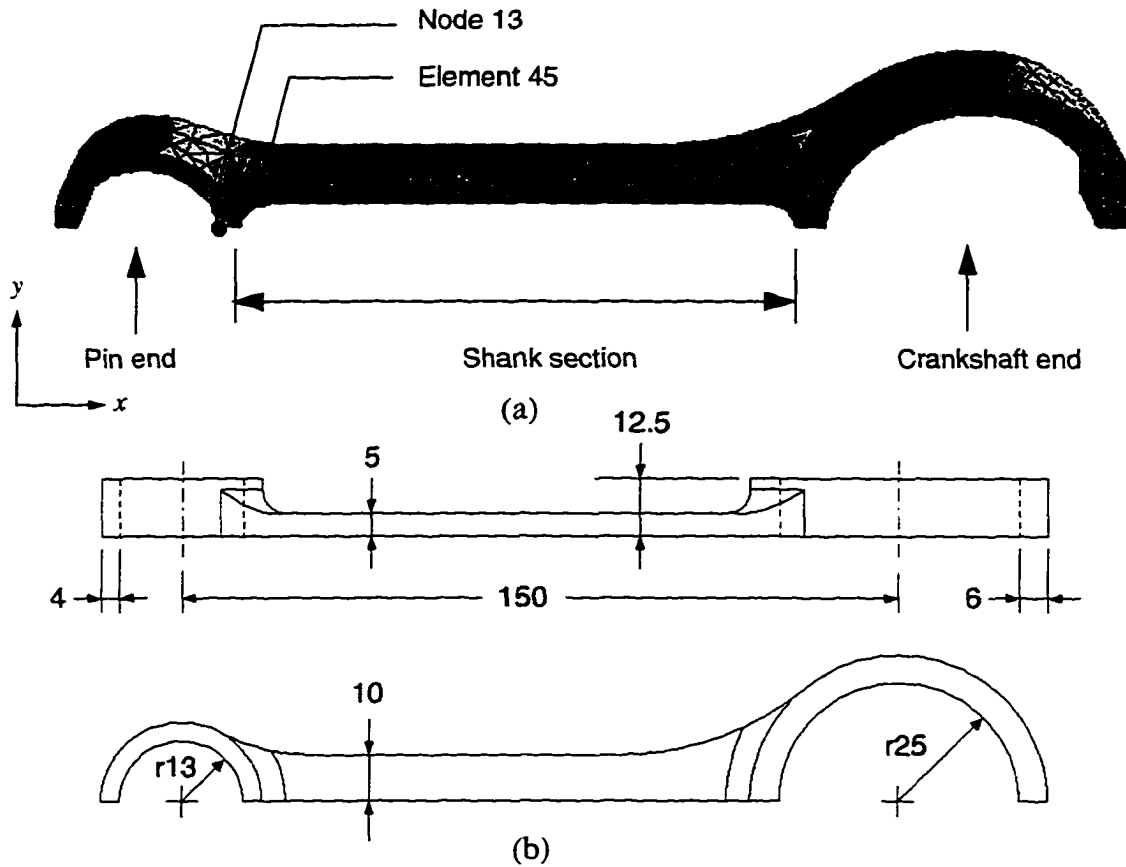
(a) Engineering connecting rod (b) Dimensions of the rod
